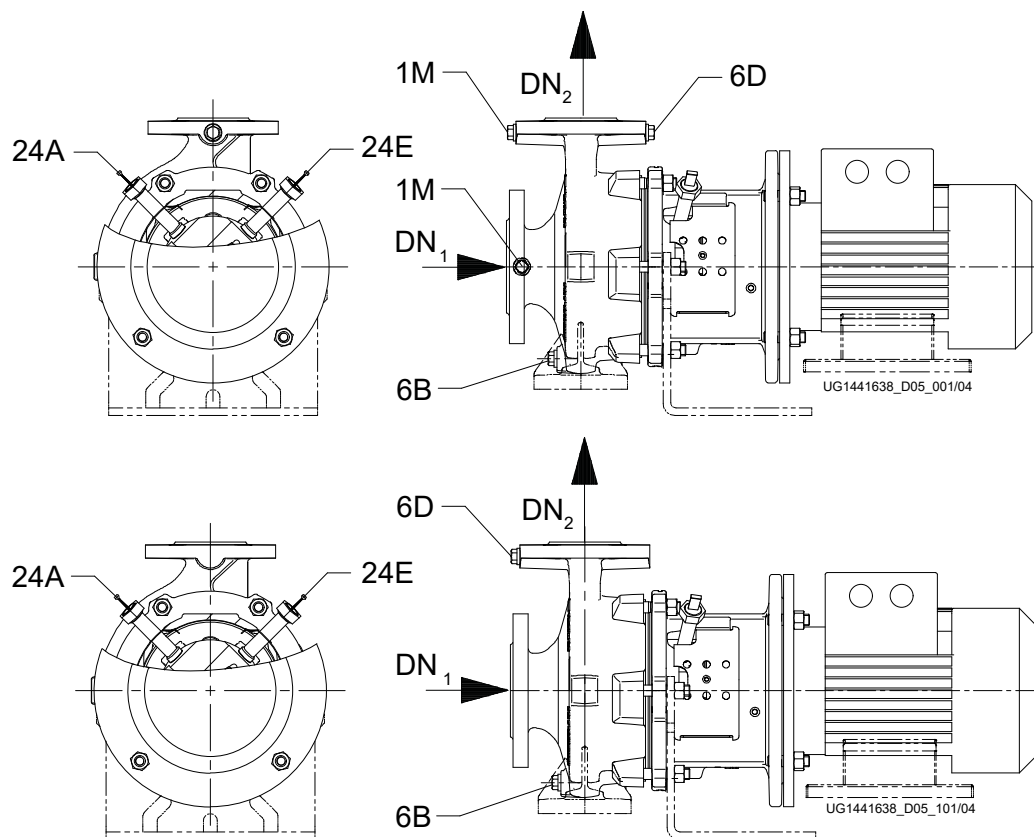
Top: Version with pressure gage connection; bottom: Version without pressure gage connection
